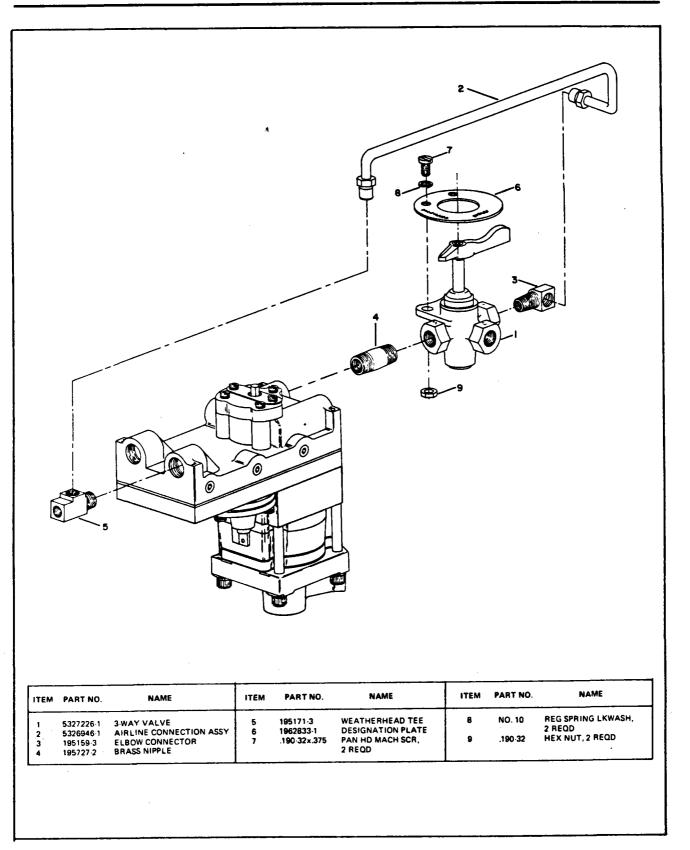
Parts Drawing P88-24, Optional Bypass Valve Assembly for Single-Acting Diaphragm Actuators, Pt. No. 5326945-1.
